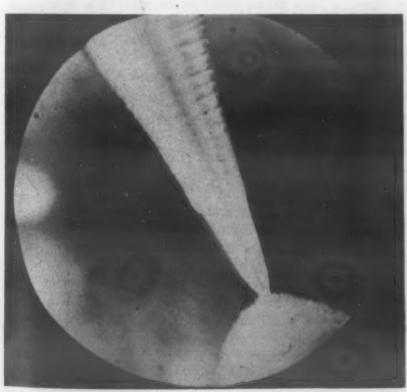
Here is a well polished die in which a mirror finish is attained in the secondary cone and bearing. This feature keeps die wear to a minimum and results in maximum uniformity in the wire produced.
